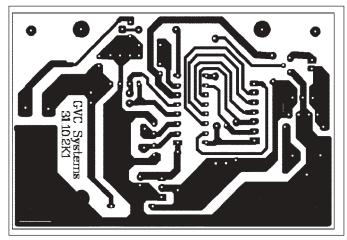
Actual-size, single-side PCB for the access-control system without keypad (Main PCB)
